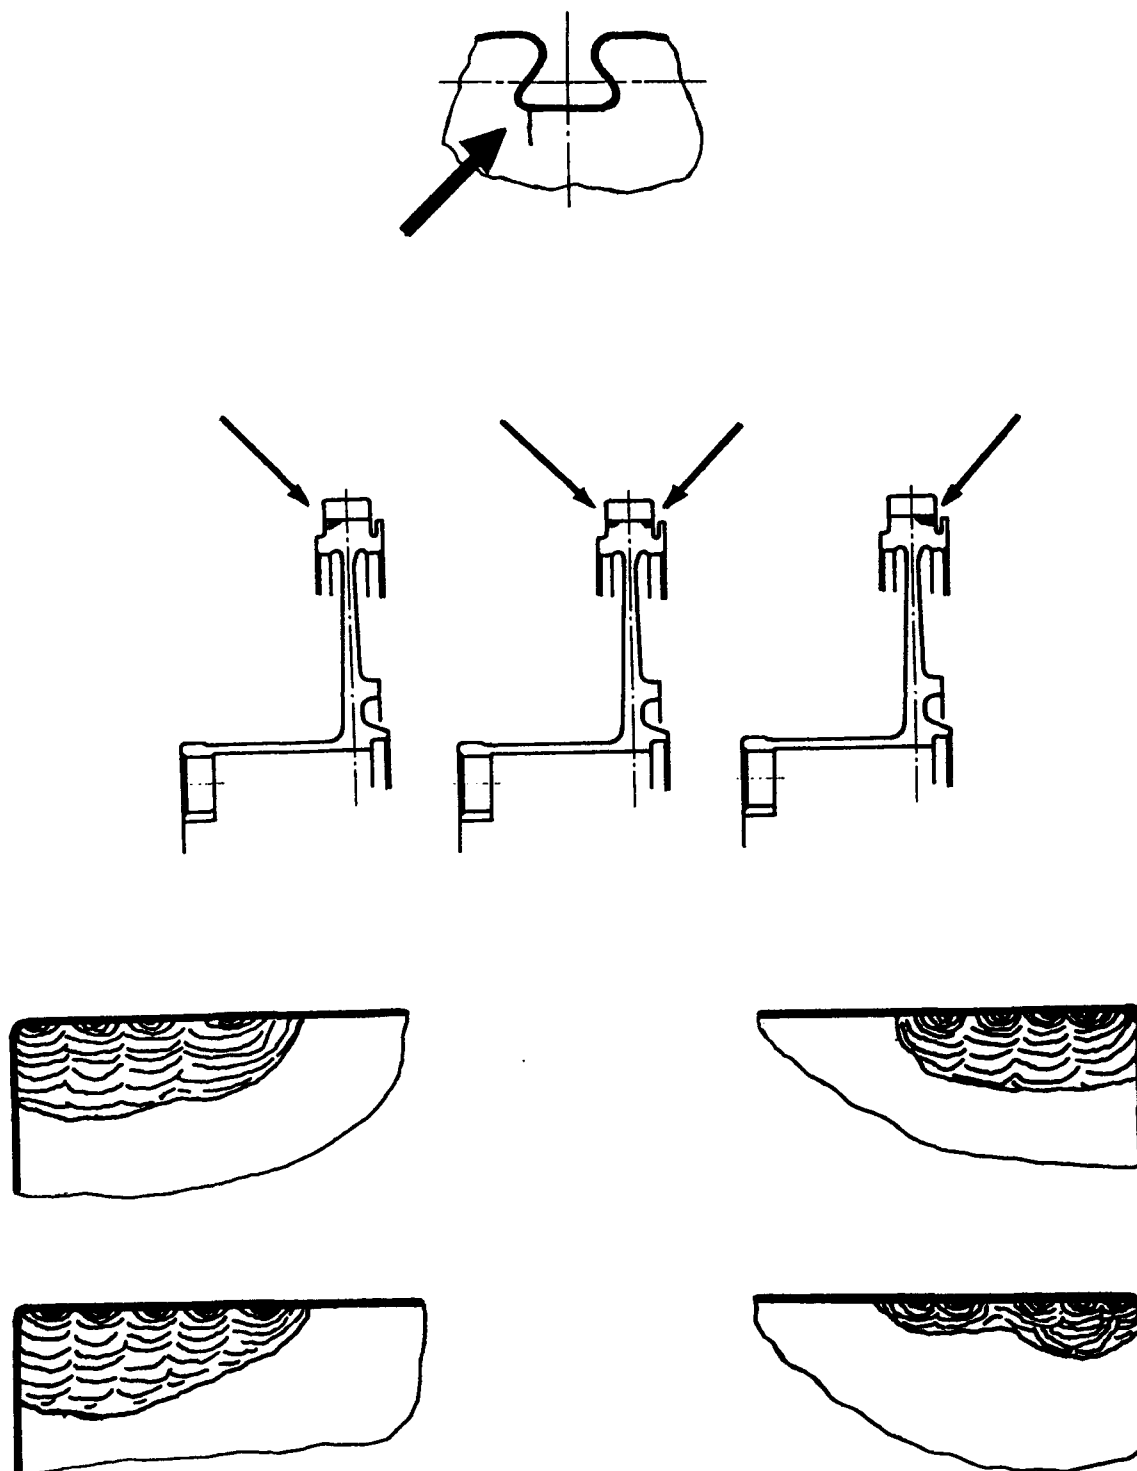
Load SequenceFig. 9.1 : Crack Shape Overview for Bolt Hole Testing
